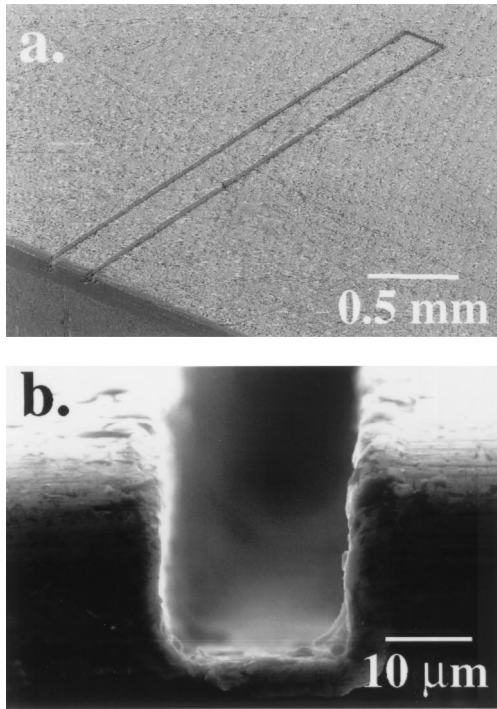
Al 6061 alloy machined using a two-edge micro-end mill. Scanning electron micrographs include a perspective view of an entire trench (a) and an end-on view from the edge of the workpiece (b).
